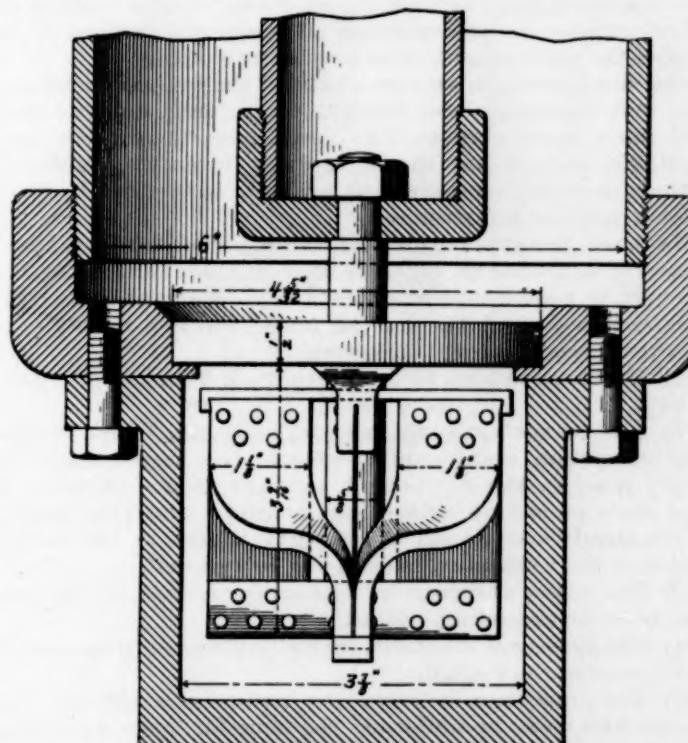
Universal pivot, or gimbal, of ribbon-steel construction, Marvin system.
